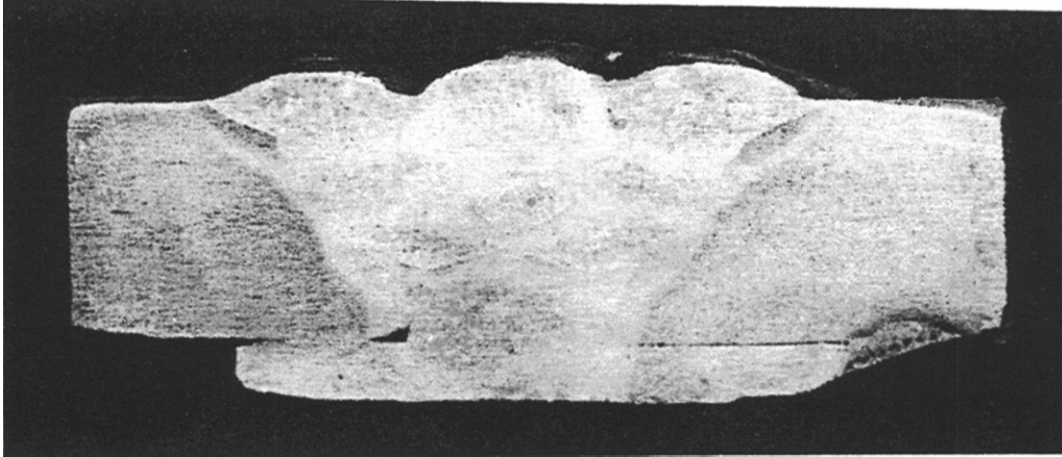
Cross-section of multipass weld performed with electrode EPS-AN1 type
